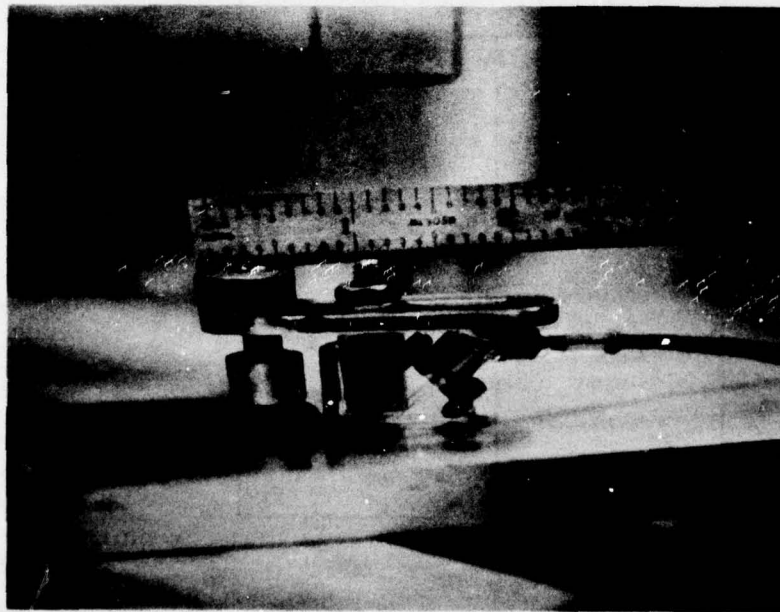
Mechanical Fixture to Rotate Transducer About Fastener
